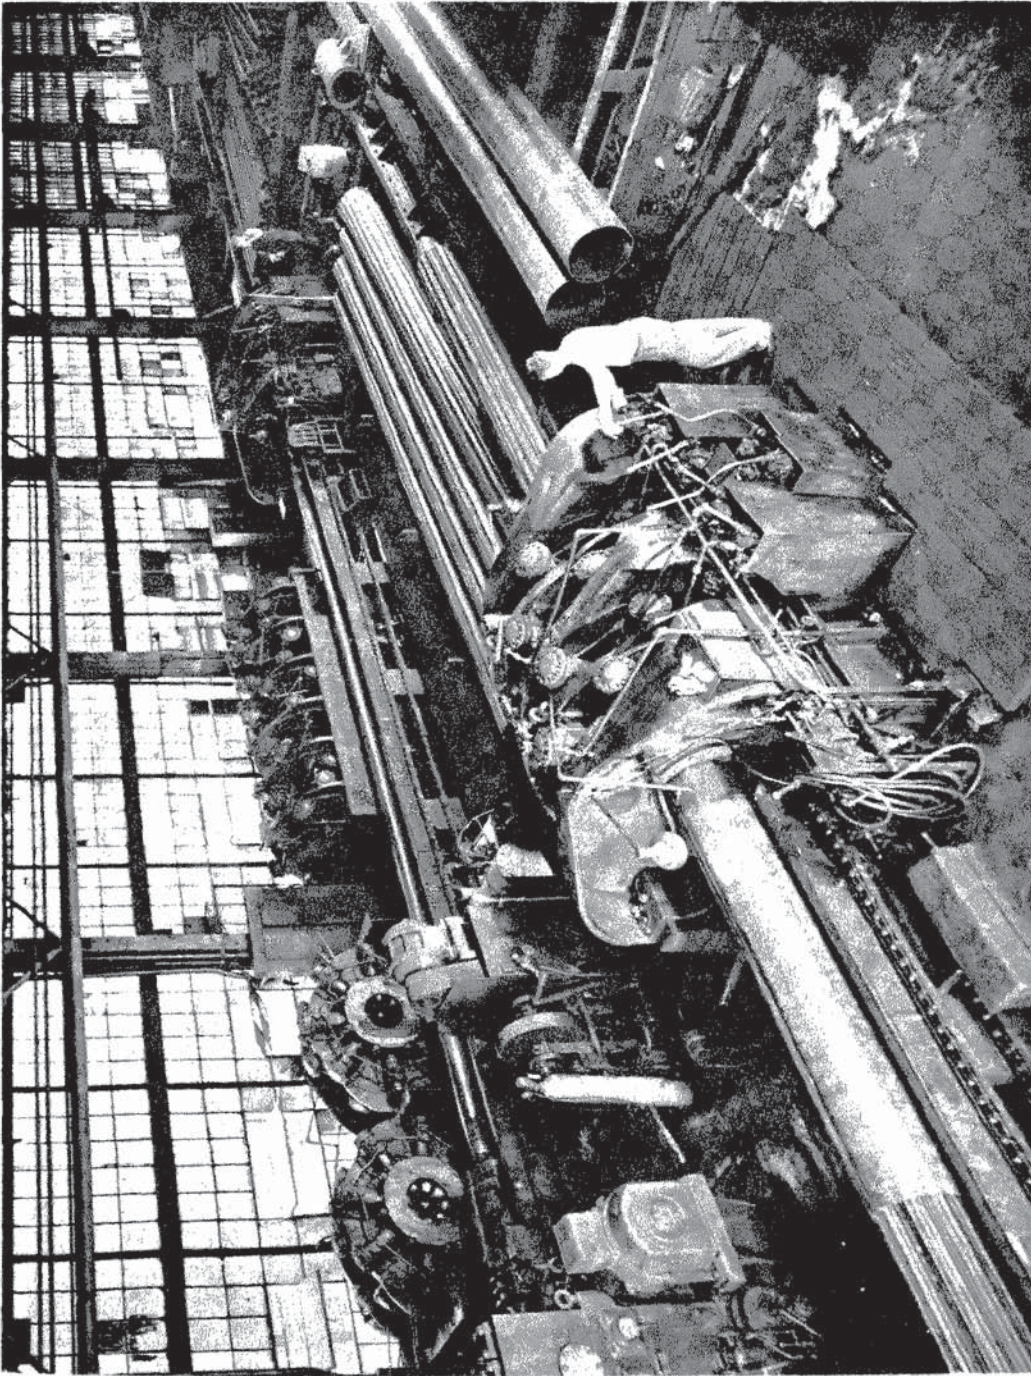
Tubes in Near Machine are "Fluted"; In Far Machine are Round
